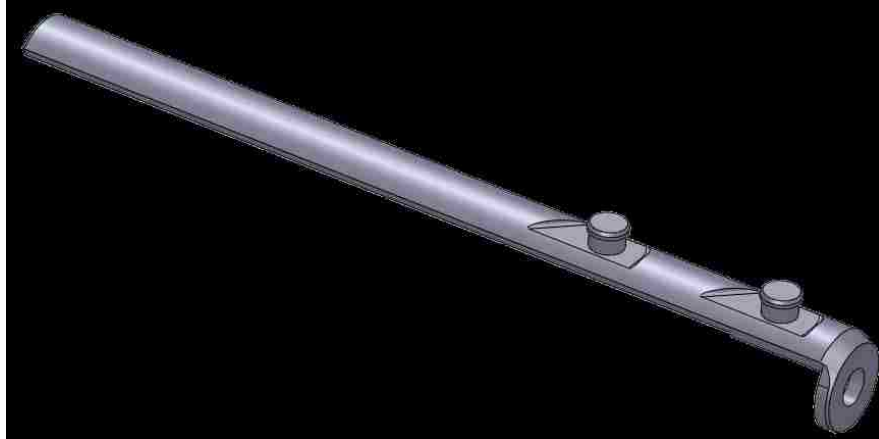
Rotary extension section shown with break-away reverse-tapered press fit joints.
